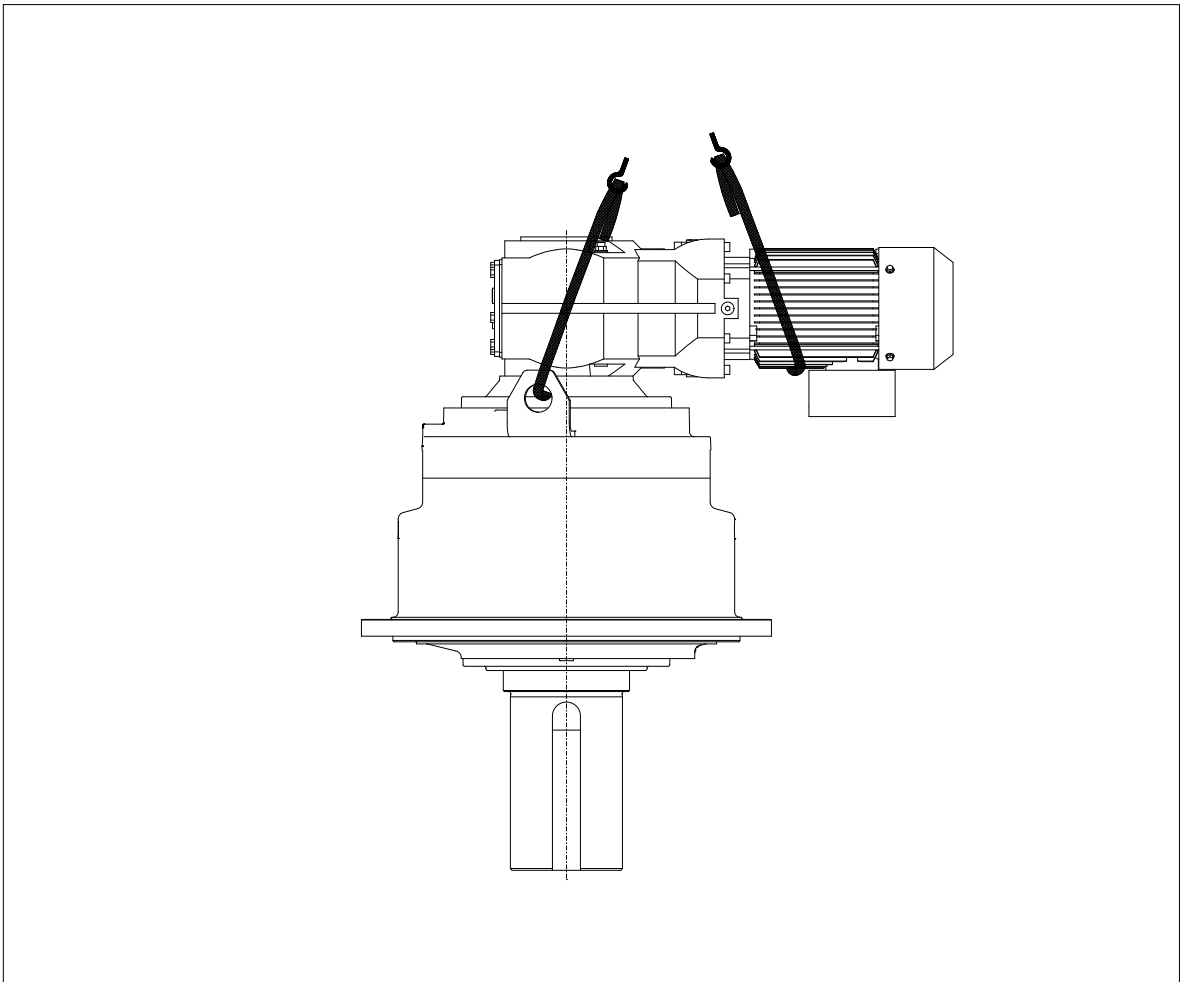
Attachment points on gear units of types O4C, O5C ("LSS" bottom) <sup>1)</sup>
